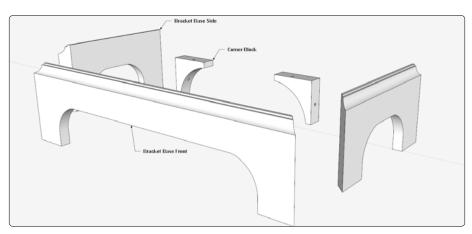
The exploded plinth or bracket base, with side, front, and corner block components.
